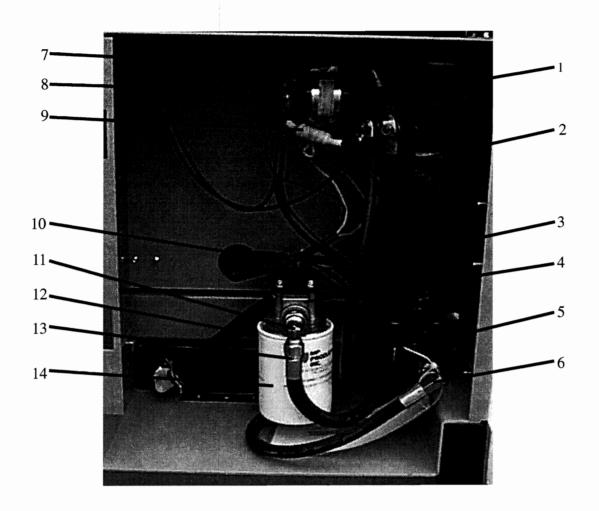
L.P. Assembly Dual Fuel Engine
